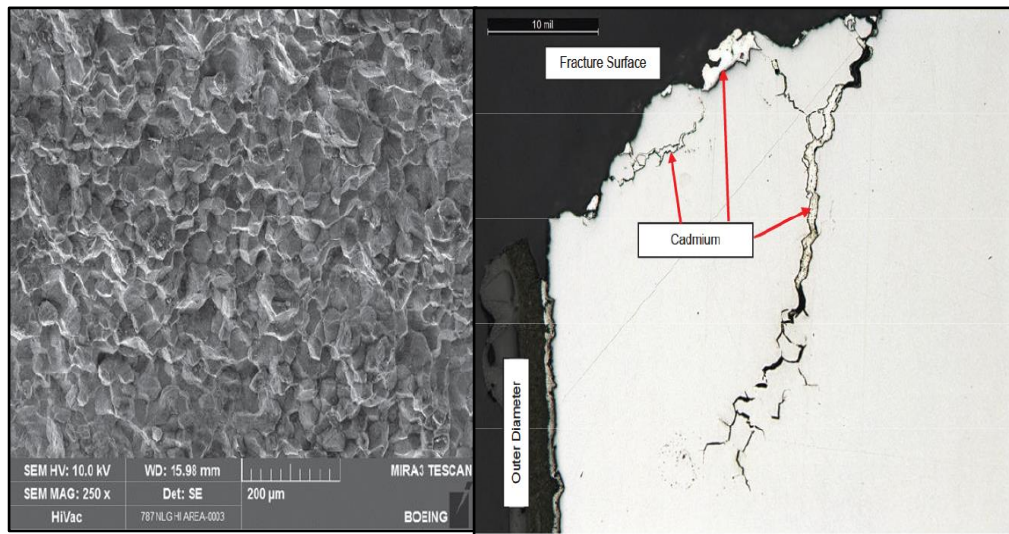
Fracture surface showing intergranular cracks containing cadmium
